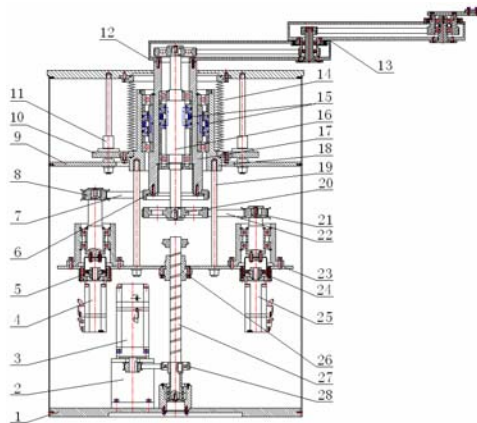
The overall structure of wafer-handling robot: 1- Base; 2- Holder of servomotor; 3- Lift AC servomotor; 4- AC servomotor of outer shaft; 5- Harmonic reducer of outer shaft; 6- Big belt pulley of outer shaft; 7- Isochronous cincture of outer shaft; 8- Small belt pulley of outer shaft; 9- Immovable platform; 10- Lift plate; 11- Linear bearing; 12- Driving end of back arm; 13- Subassembly of robot arm; 14- Bellows seal; 15- Magnetic fluid rotary seals; 16- Inner shaft; 17- Outer shaft; 18- Sleeve; 19- Draw-bar; 20- Big belt pulley of inner shaft; 21- Small belt pulley of inner shaft; 22- Isochronous cincture of inner shaft; 23- Movable platform; 24- Harmonic reducer of inner shaft; 25- AC servomotor of inner shaft; 26- Screw-nut; 27- Screw; 28- Belt pulley of screw
